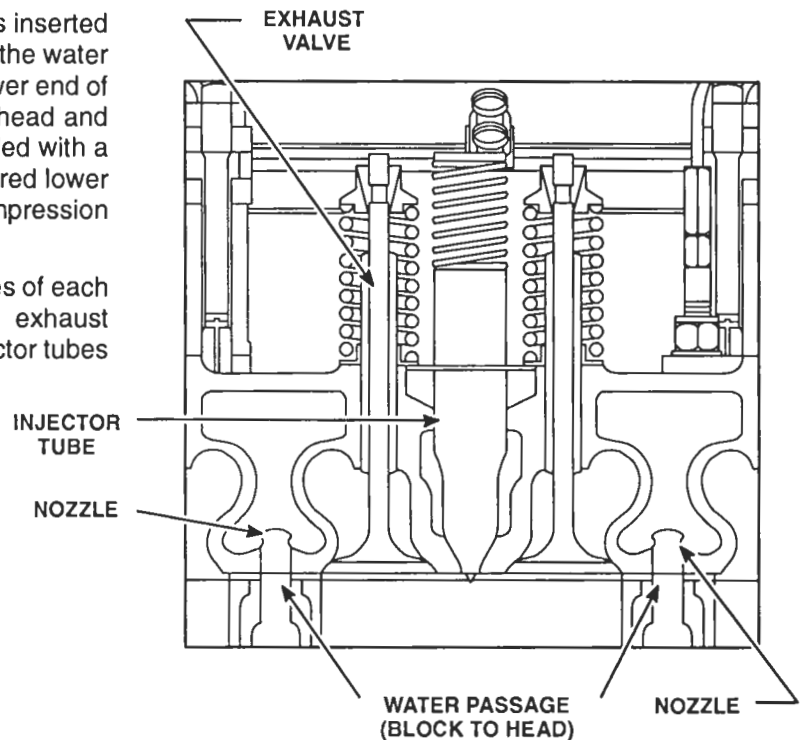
Coolant Passage Around Exhaust Valves and Fuel Injectors
